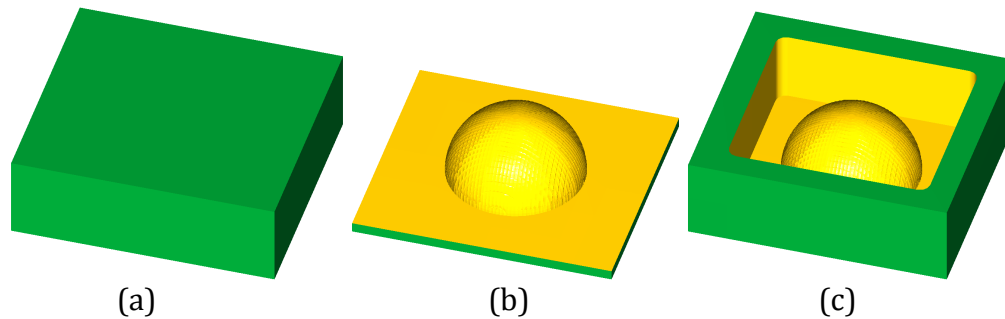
a) Stock material before machining. b) Stock is machined to reveal a part, without tool containment boundary. c) A rectangular tool containment boundary is used to allow some of the original stock surrounding the part to remain.
